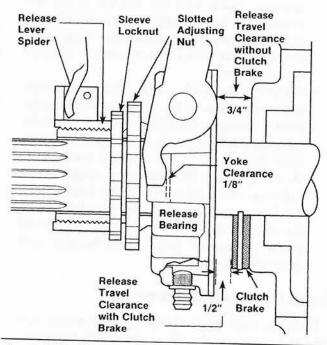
Clearance between release bearing and clutch housing on clutches with a clutch brake. (Courtesy of Eaton Corp.—Eaton Clutch Div.)
